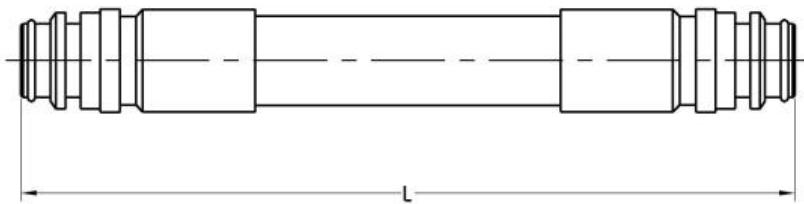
Threaded type hose assemblies – Locations for measuring hose lengths
